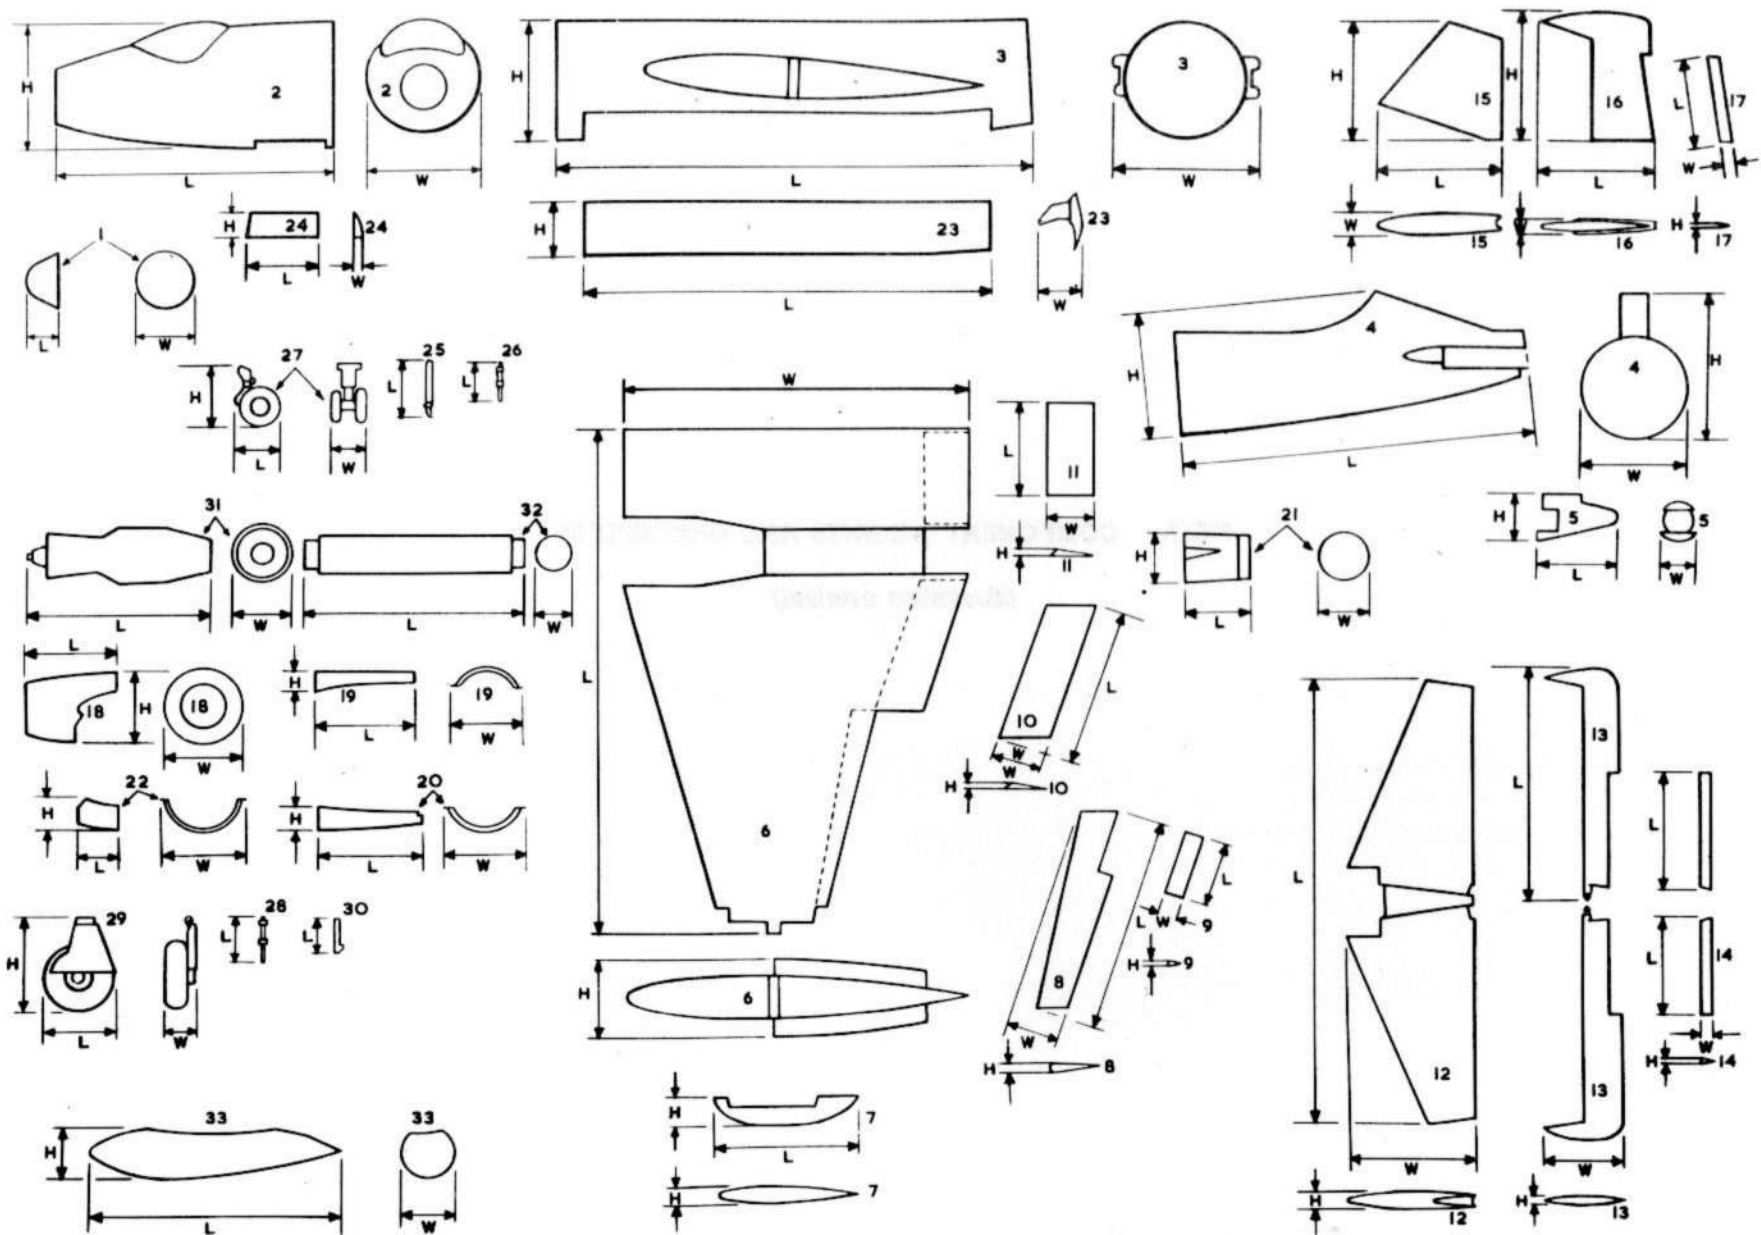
COMPONENT WEIGHTS AND DIMENSIONS
